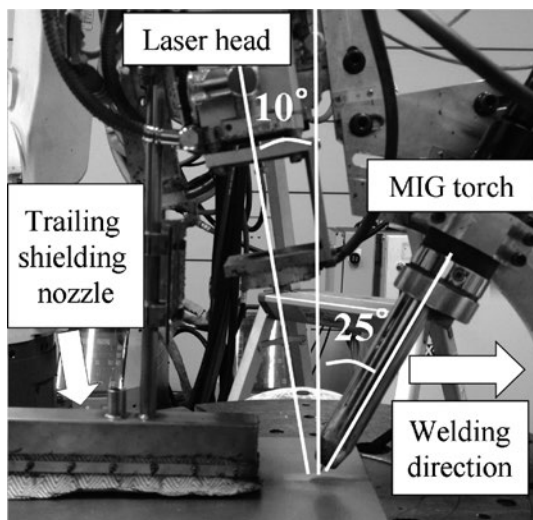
Setup of 10 kW fiber laser head and MIG arc torch for hybrid welding.
